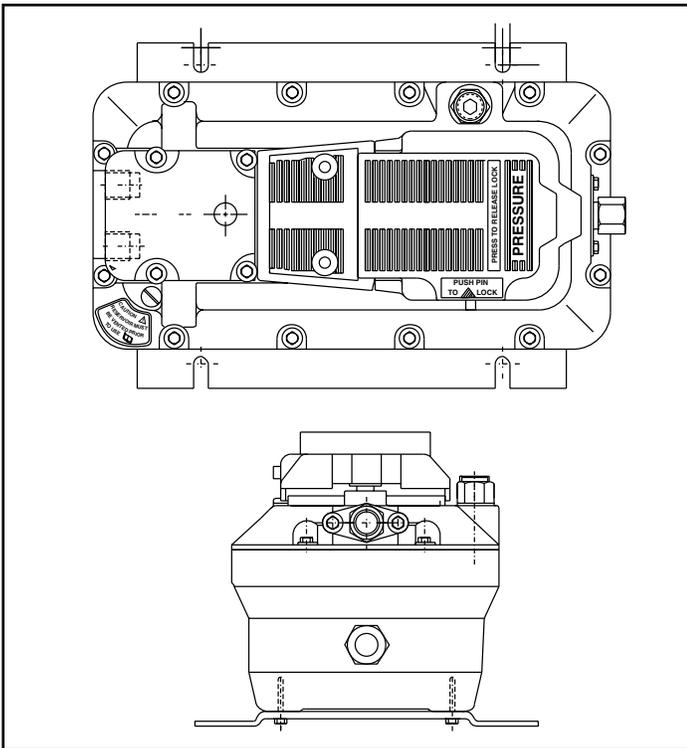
, Pump Mounting Bracket Dimensions 2 Liter
